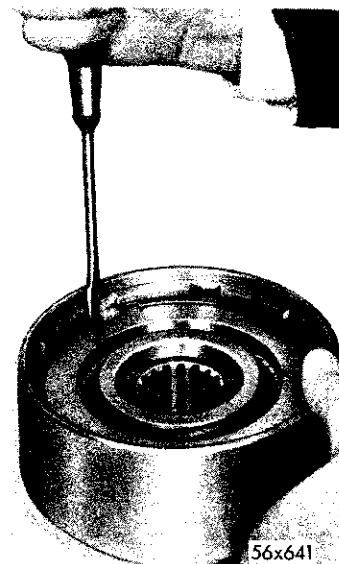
Removal and Installation of Rear Clutch Piston Retainer Snap Ring
